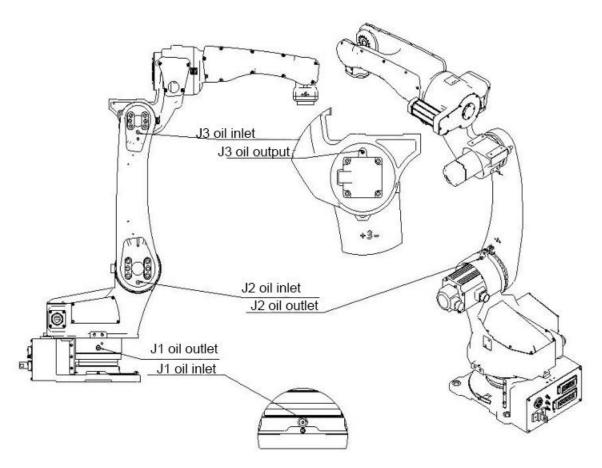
Locations of grease holes and oil filling requirements for each axis of BR-1510A Note: When filling oil for J1 axis, remove the sheet metal parts near the oil filling holes.
